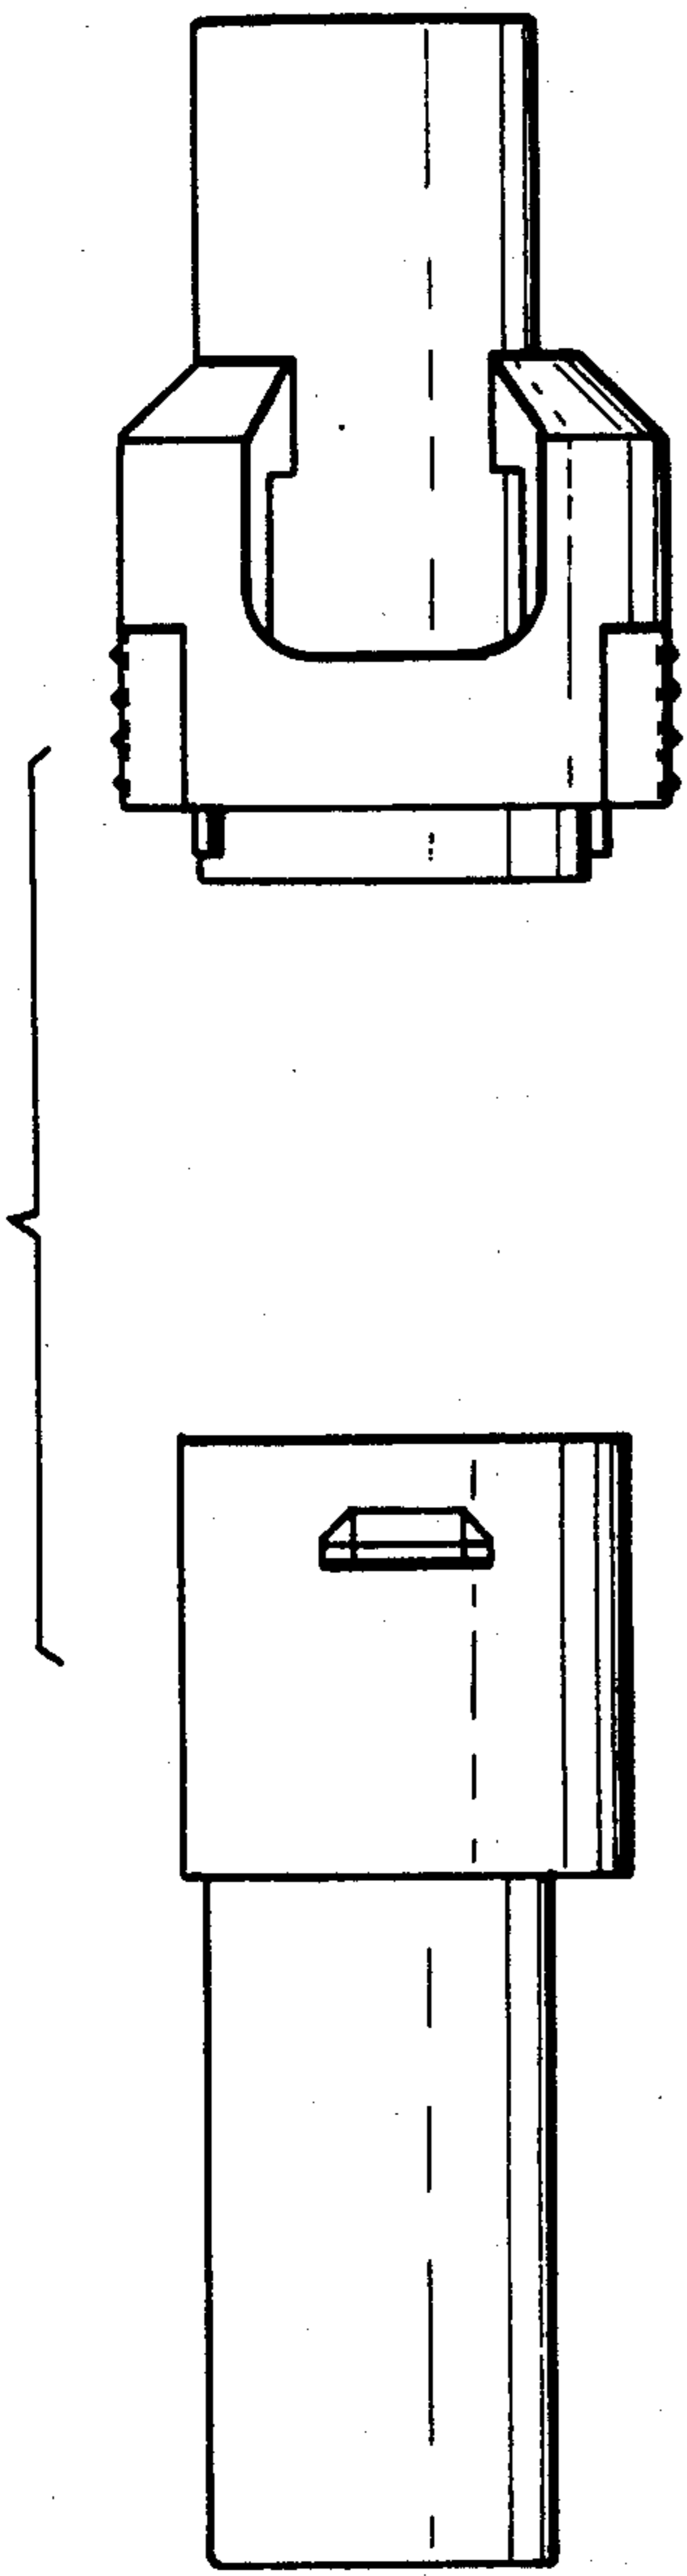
is an elevation of one side of the subject environmentally sealed connector assembly in an exploded or unmated condition;
